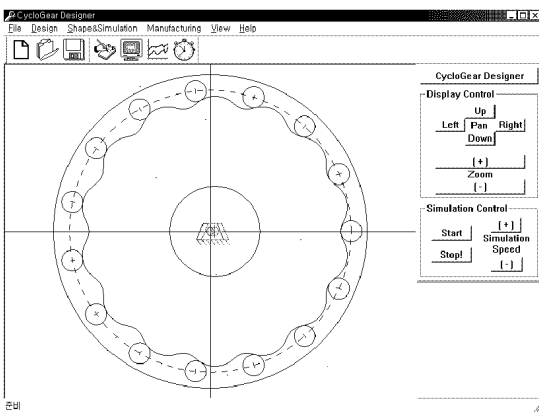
Screen for assembled cycloidal plate gear at rotating outer-ring type
